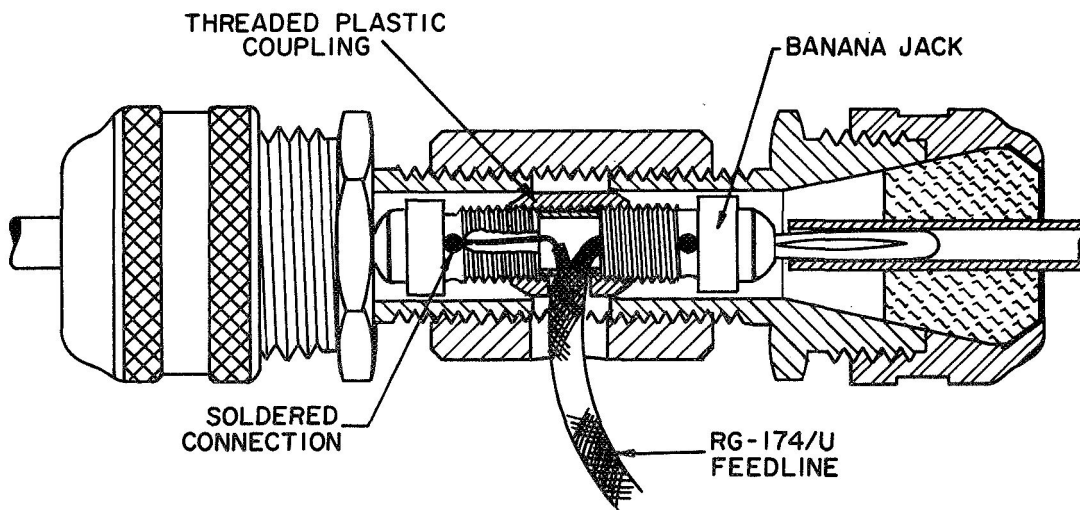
DRIVEN-ELEMENT FITTING ASSEMBLY.
